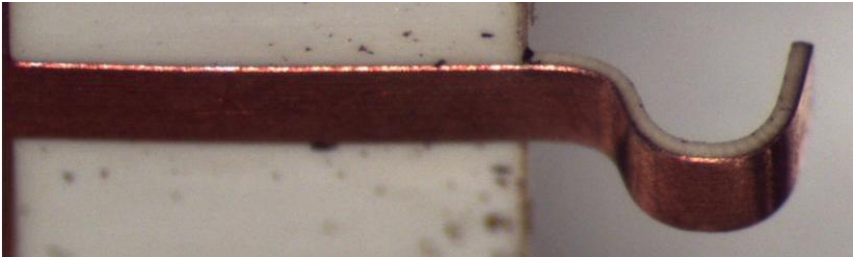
LCP Spring Formed With Hybrid Mold Using a 0.030" Gauge Pin
